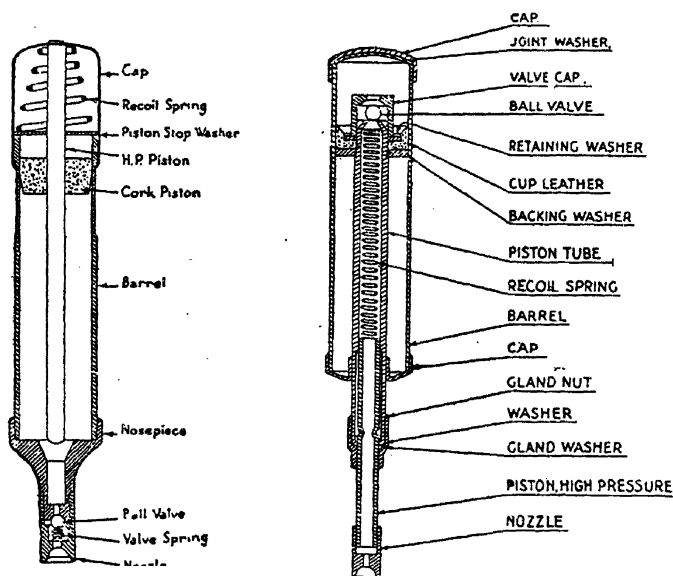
Two Alternative Types of Chassis Lubrication Grease Guns (Tecalemit).
